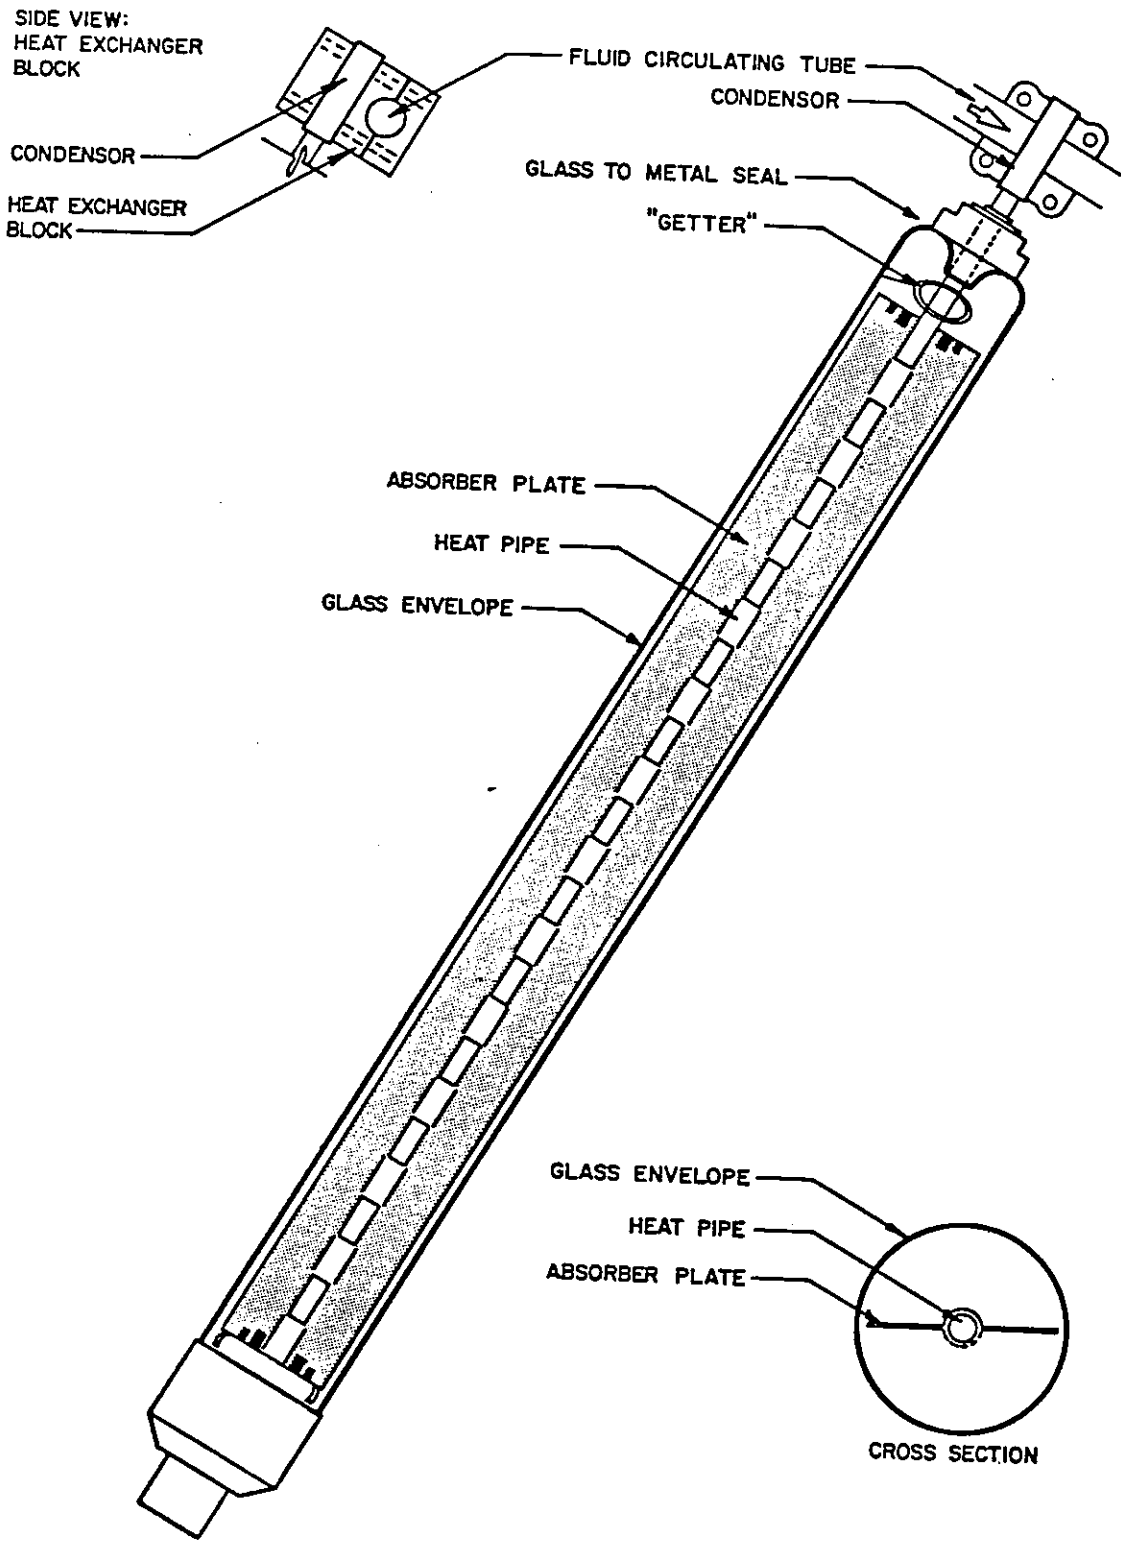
Metal Fin in Vacuum Tube Type -- Heat Pipe Heat Extraction
